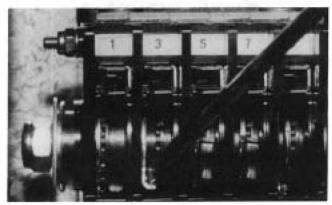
Auxiliary Switch Adjustment—Prying Contact Cam
